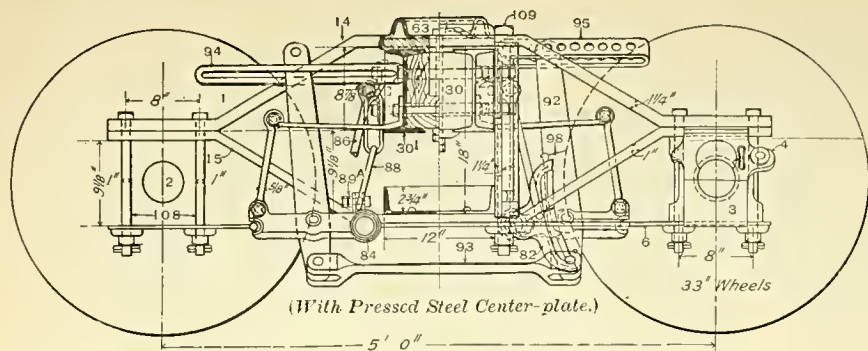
Half Longitudinal Section and Half Side Elevation.
